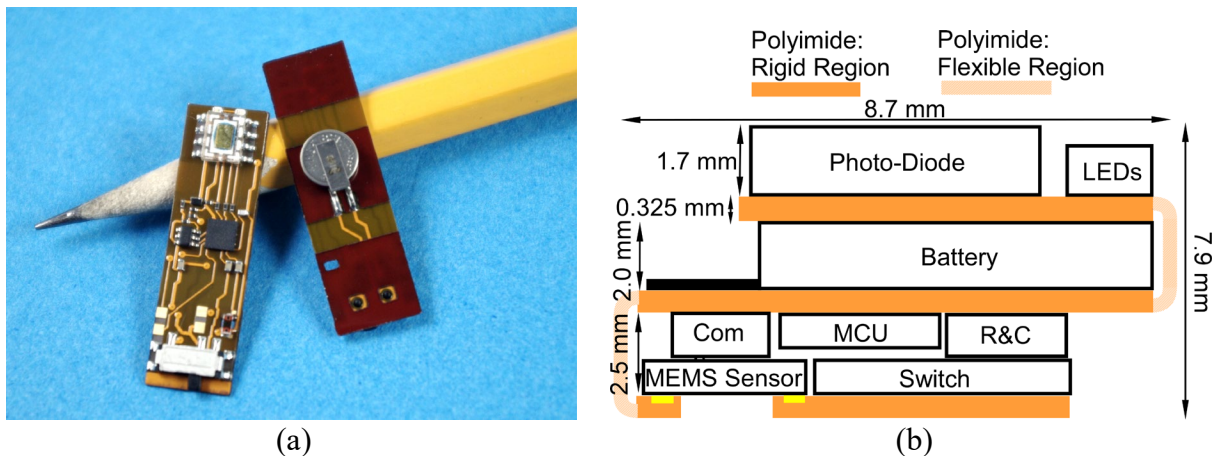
4: Unpackaged ELM system and stack configuration. (a) Unpackaged ELM system with an integrated pressure sensor. (b) Folded PCB dimensions. PCB is 8.6 mm into the page.
